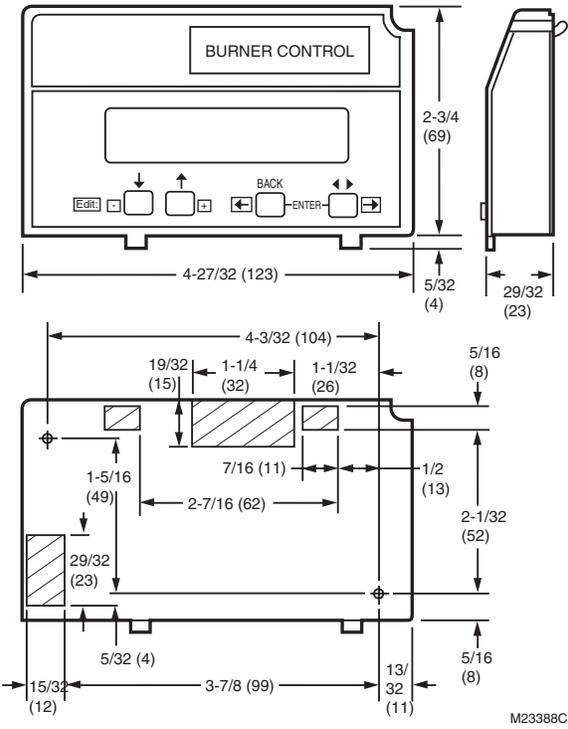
Mounting dimensions of Keyboard Display Module, in inches (mm).
